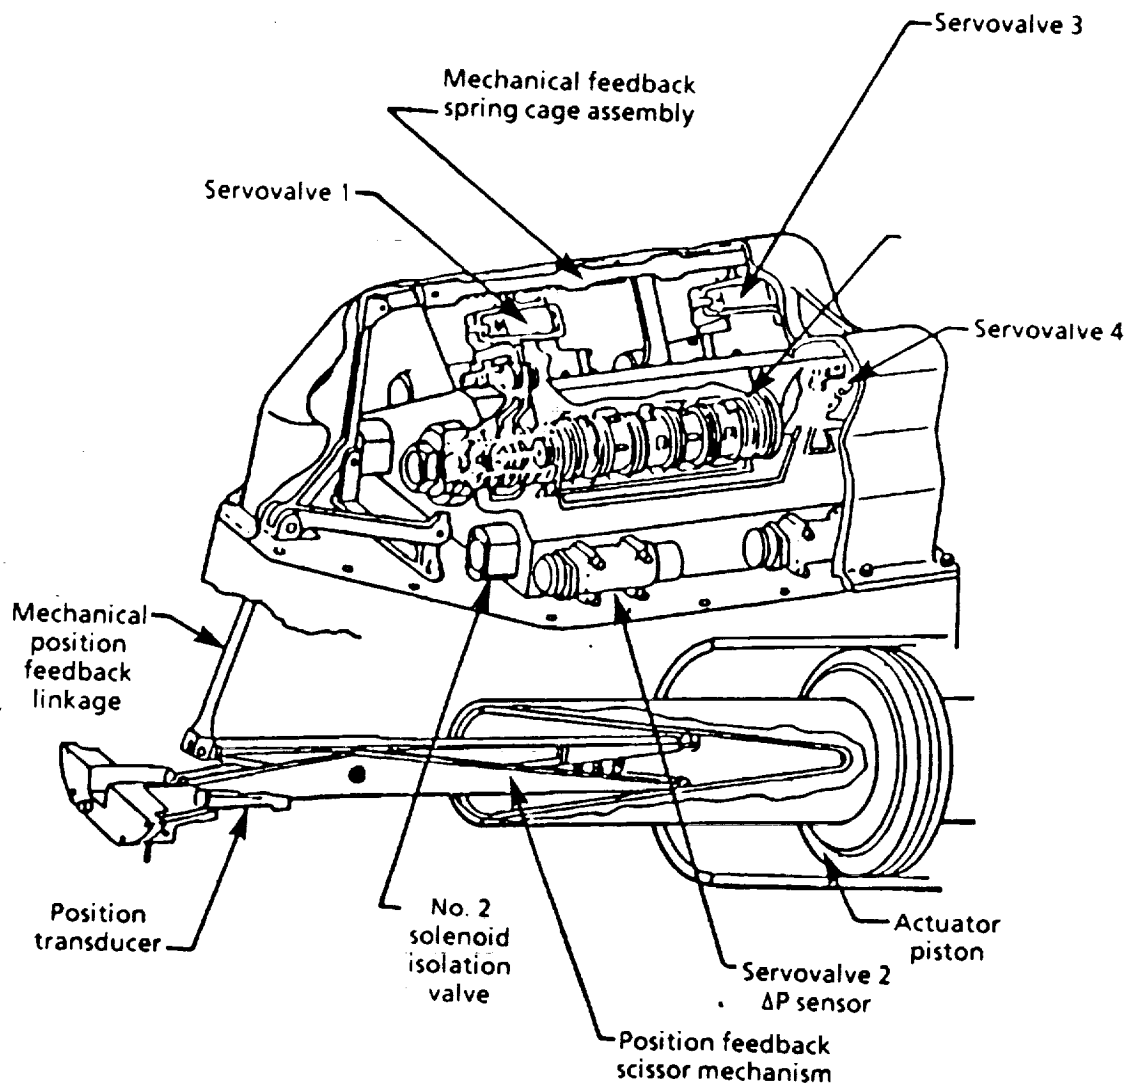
TYPICAL ACTUATOR ASSEMBLY
